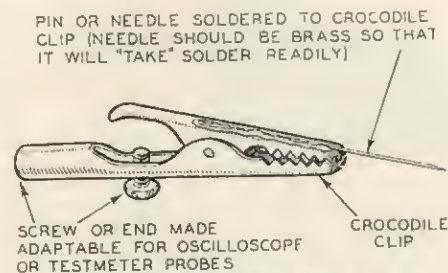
CONSTRUCTION OF A NEEDLE-POINT PROBE FOR TESTING PRINTED WIRING PANELS.
